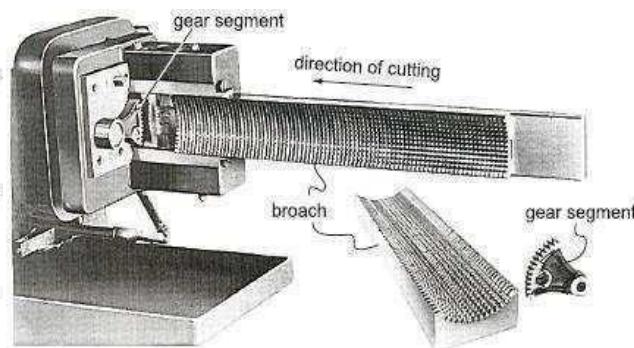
(b) Broaching the teeth of a gear segment of external spur gears by broaching by horizontal external broaching in one pass
